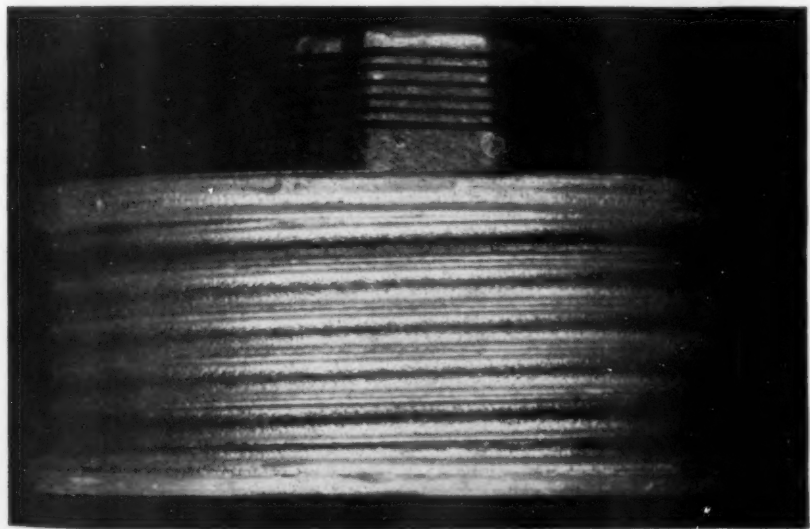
SIX CUTS CAN BE SEEN IN THE HUE OF THIS SMALL PULLEY CASTING. THEY PROVIDE FIVE SLICES FOR X-RAY MICROGRAPHY.
